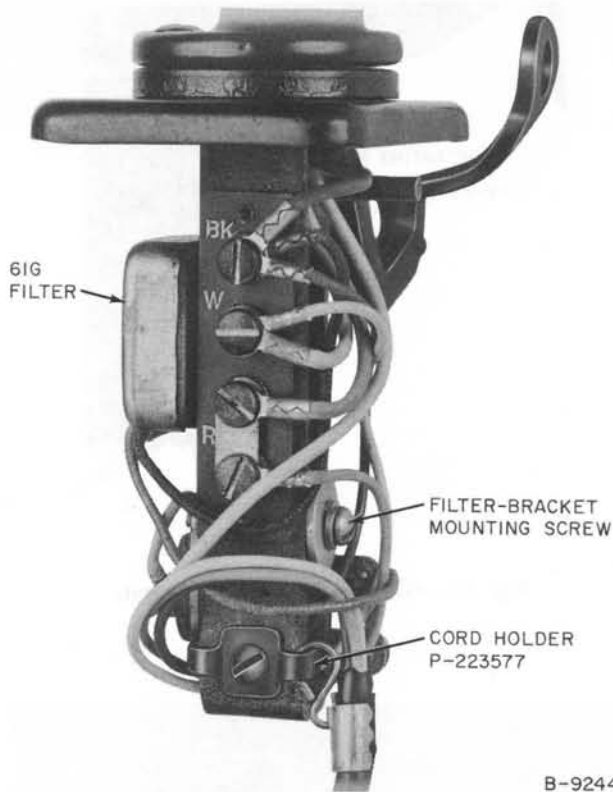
Assembly of Filter on C-Type Handset Mounting
